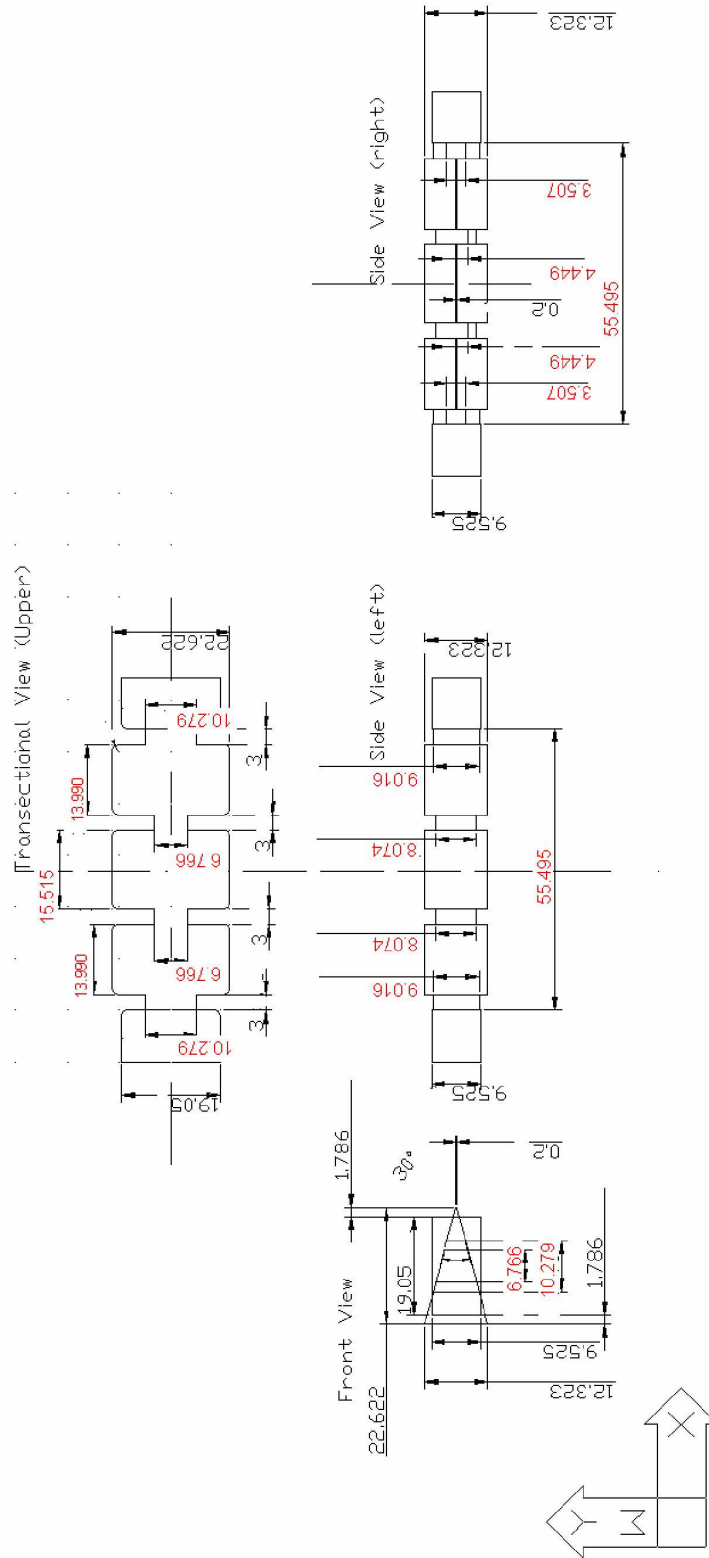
Autocad model of the wedge-shaped bandpass filter dimensions. The dimensions marked in red correspond to the re-adjusted dimensions due to the ball-end mill with a high radius of curvature.
